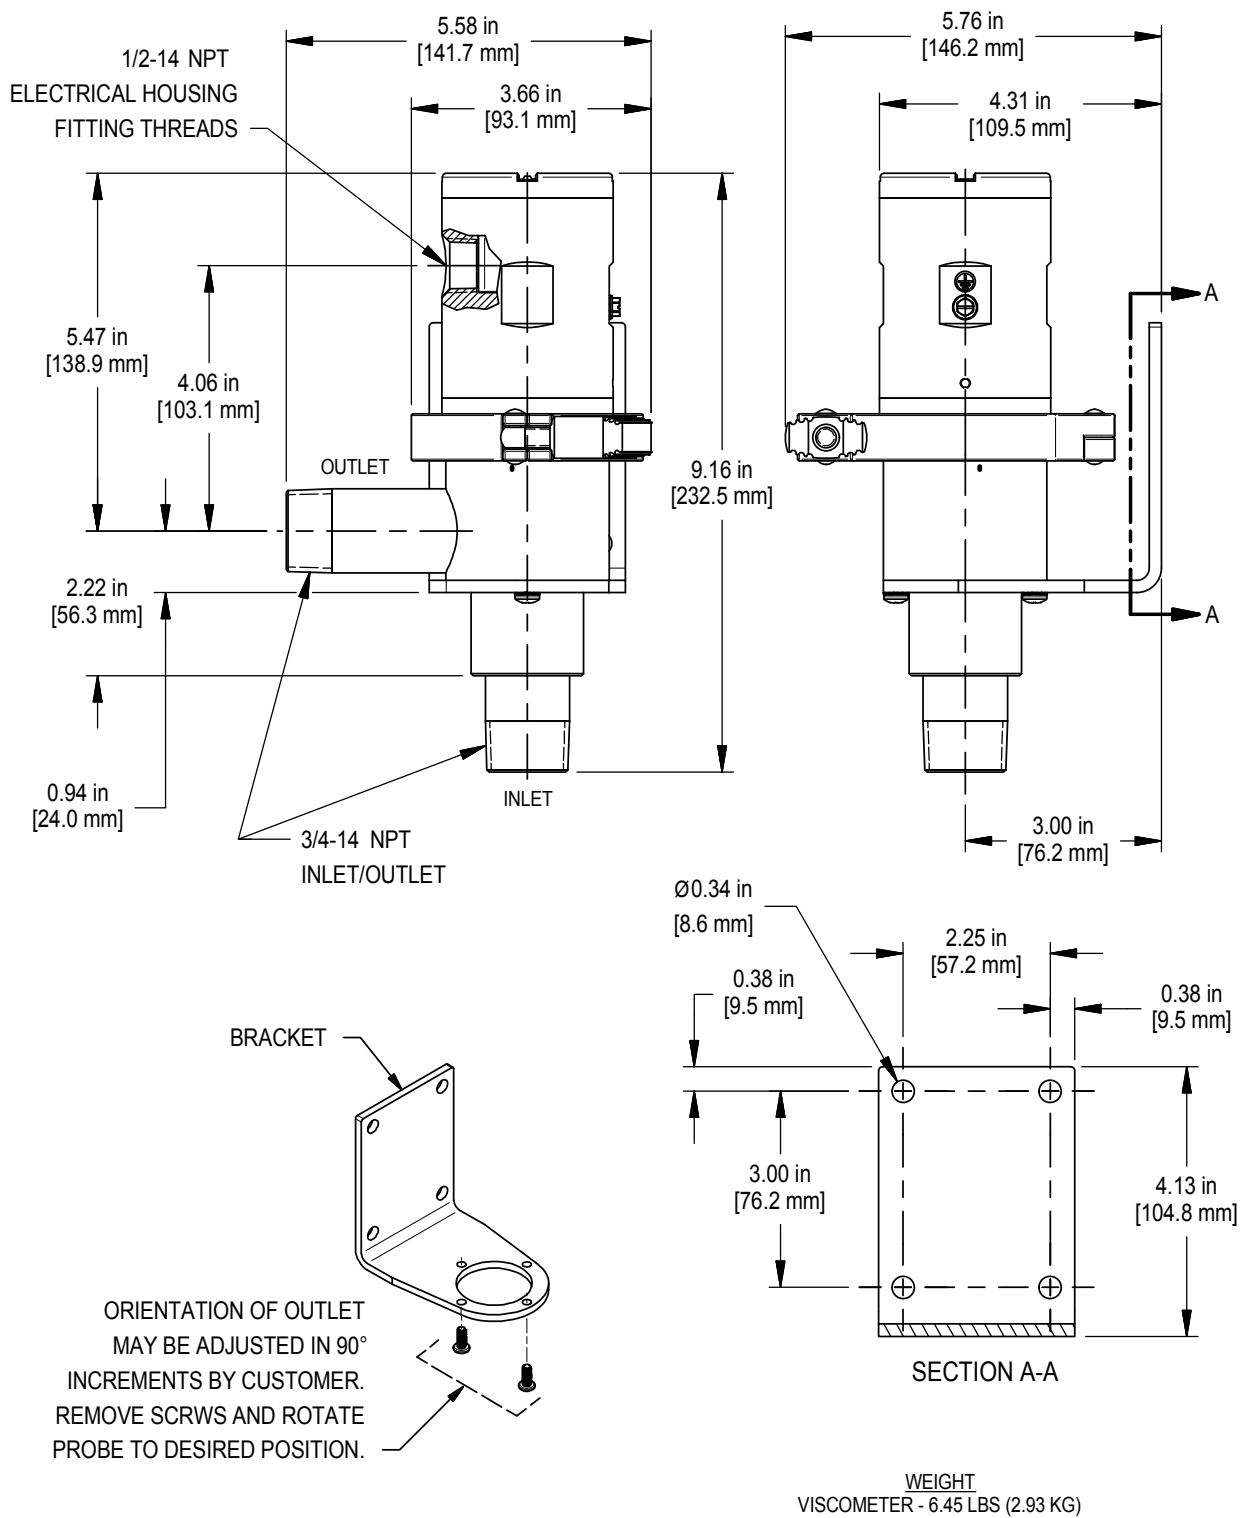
FAST-10X (Male Chamber) Bracket Mounting and Clearance
